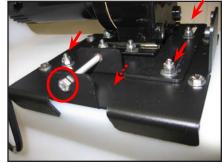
Loosen Nuts and 1 Screw on Motor Adjustment Mount
